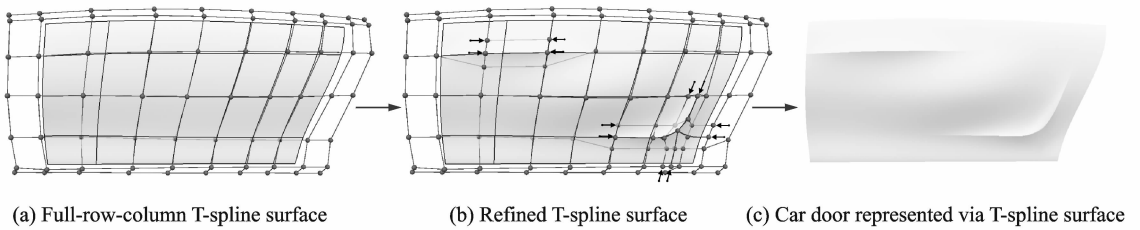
Local-feature-line building over full-row-column T-spline surface
